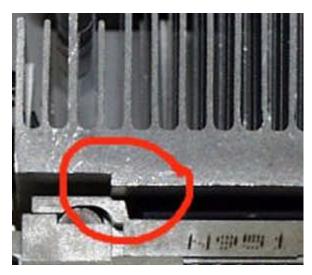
Make sure the Heatsink is Seated Properly on the Processor!
